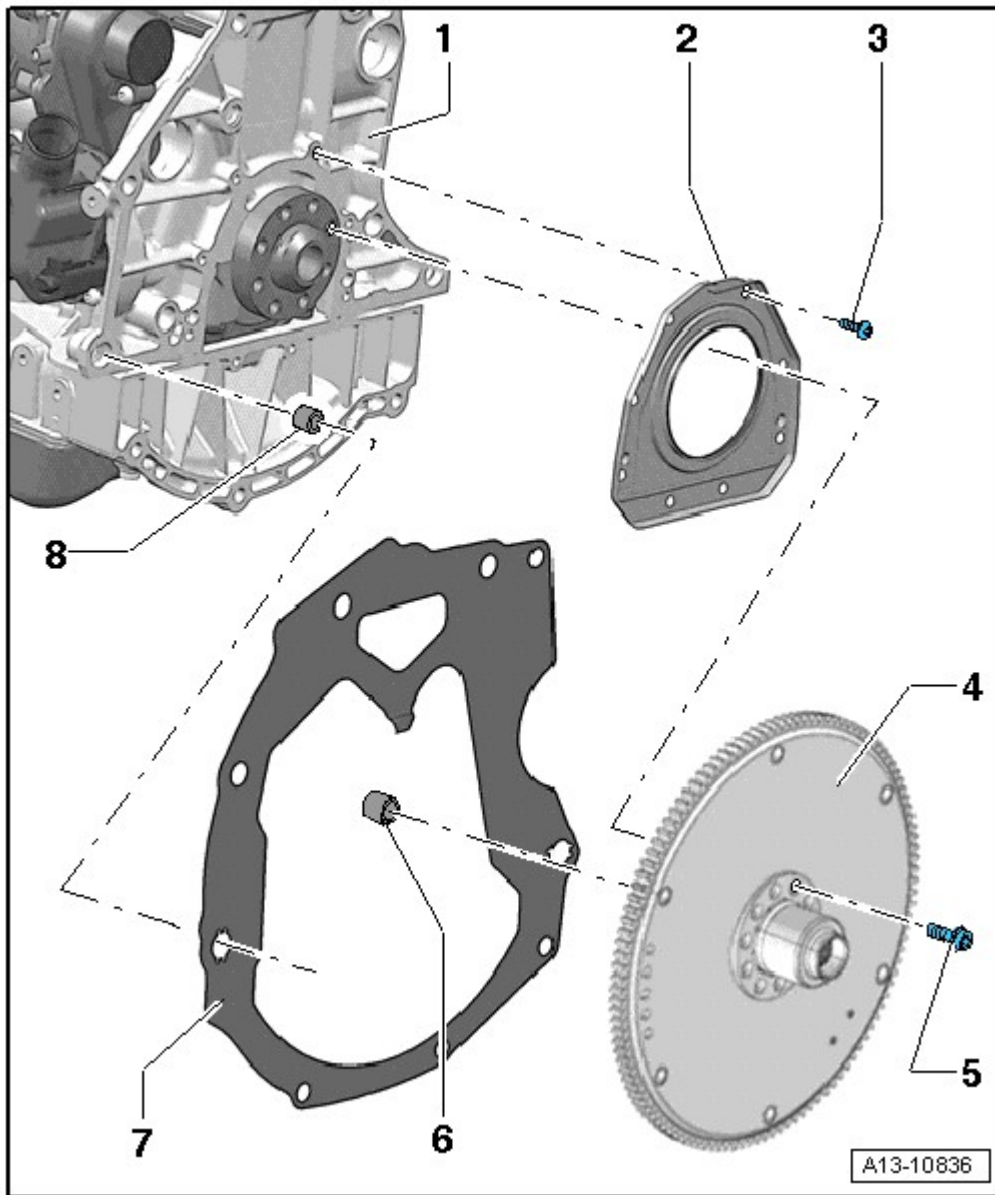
Identifying Sealing Flange And Drive Plate Overview
